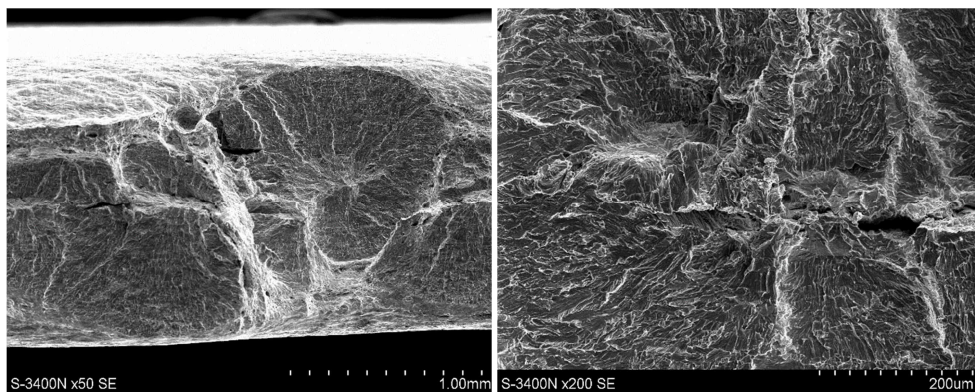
View of the fracture surfaces of samples of steel DC01 unhydrogenated and stretched
